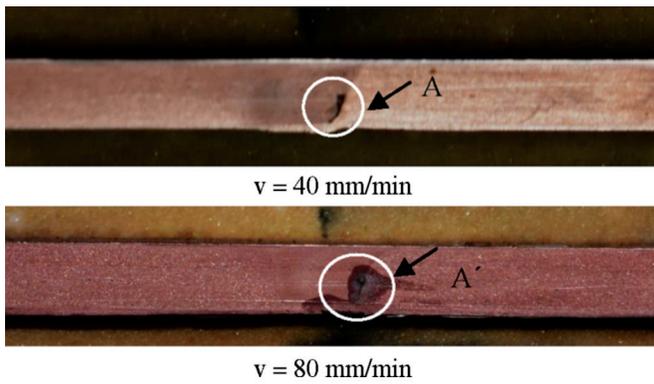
Macroscopic appearance of FSW Cu99 welding.
